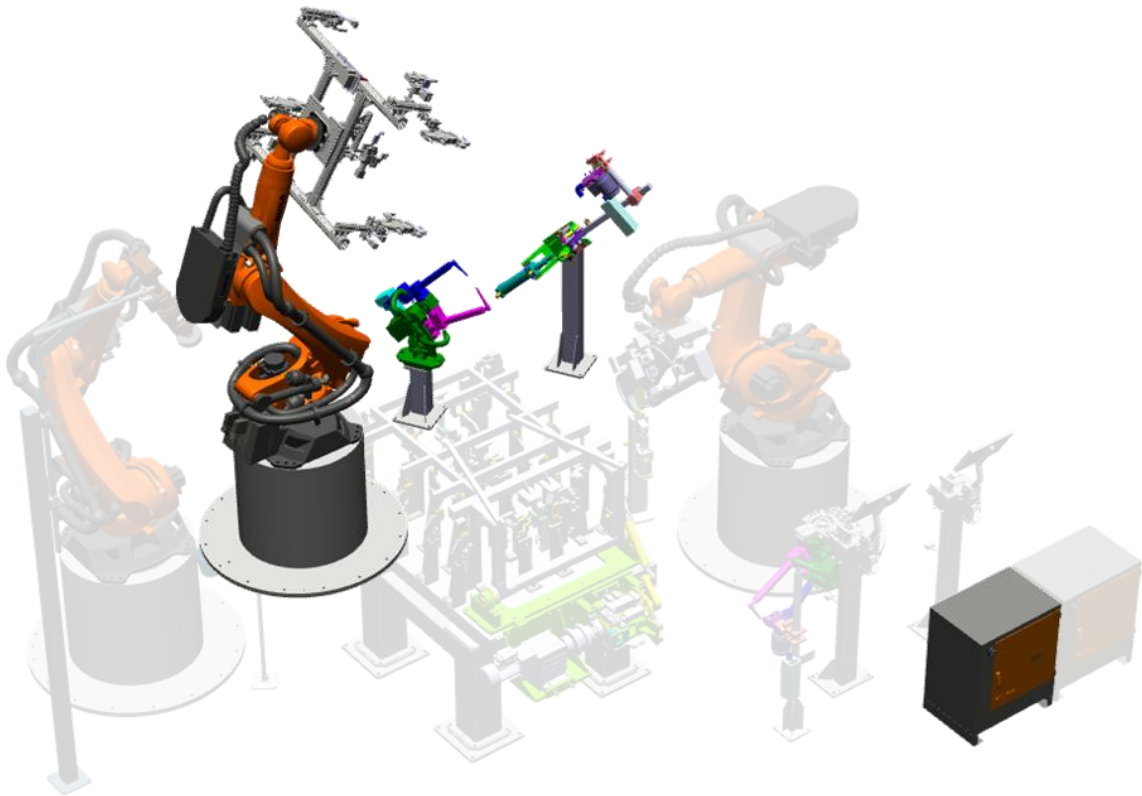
Robot with gripping system, stationary welding tongs and control cabinet
